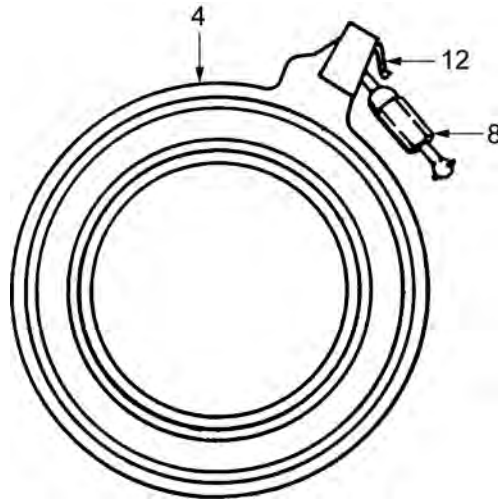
Outer Brake Adjusting Link Installation in Right Brake Apply Cam.
